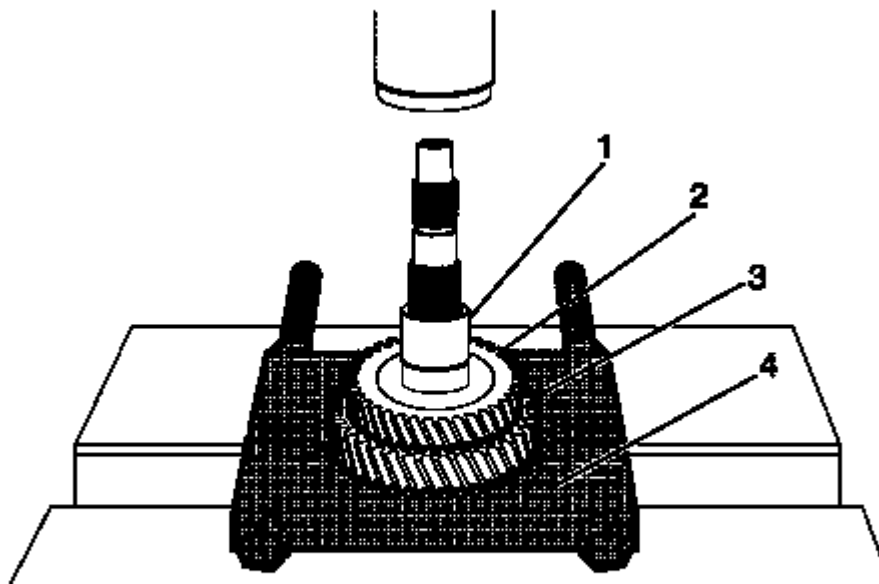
Counter Shaft 3rd-4th Gear Spacer
